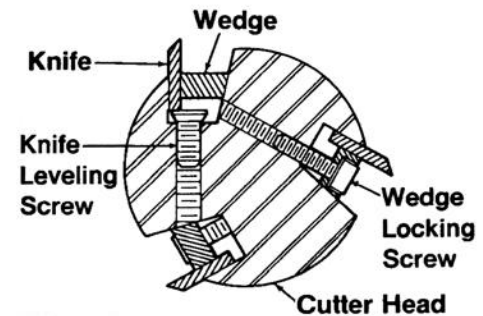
When reinstalling a knife in the cutterhead, be sure the cutting edge points toward the outfeed side of the machine. The square side of the wedges should butt up against the knife, as shown.
